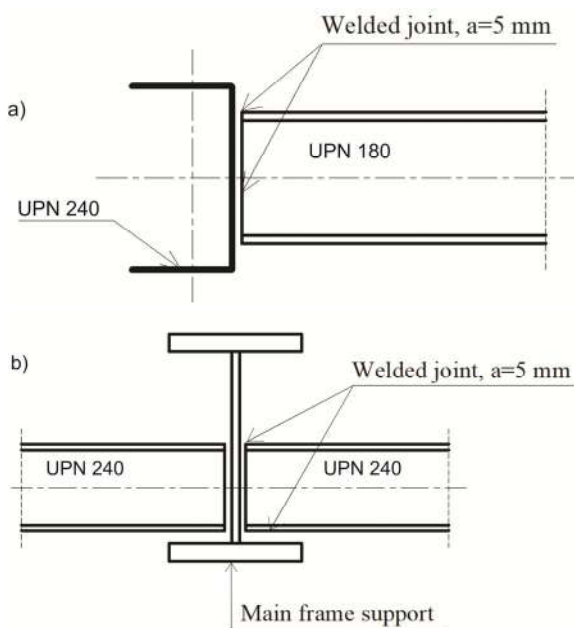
a) Joints of longitudinal and cross profiles; b) The joint of the longitudinal profiles and main girder
